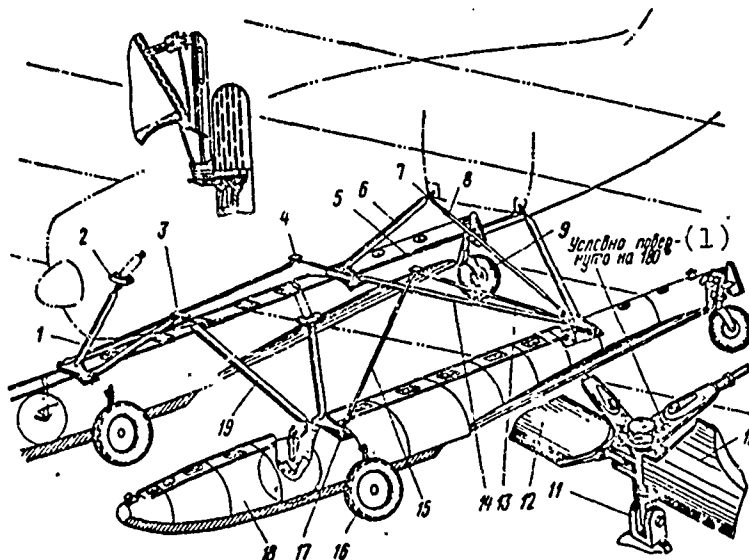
Landing gear truss: 1 - front strut; 2 - mounting lug of the front strut to the pyramid of the wing center section; 3 - joint on fuselage frame No. 4; 4 - joint on fuselage frame No. 8; 5 - bracing strip No. 11; 6 - rear strut; 7 - mounting lug of rear strut to fuselage frame No. 15; 8 - bracing strip No. 11; 9 - rear wheel of rolling bogie; 10 - cross-member of rear strut; 11 - mounting lug of rear strut to float; 12 - brace; 13 - bracing strip No. 9; 14 - brace; 15 - bracing strip No. 14; 16 - front wheel of rolling bogie; 17 - mounting lug of front strut to float; 18 - float; 19 - brace strut.
